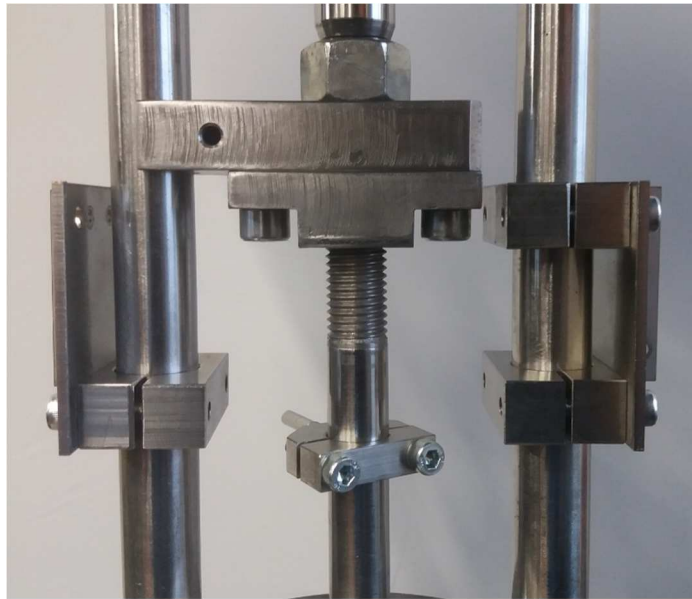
Mounting elements of the handle on the valve, not blocking the valve stem
